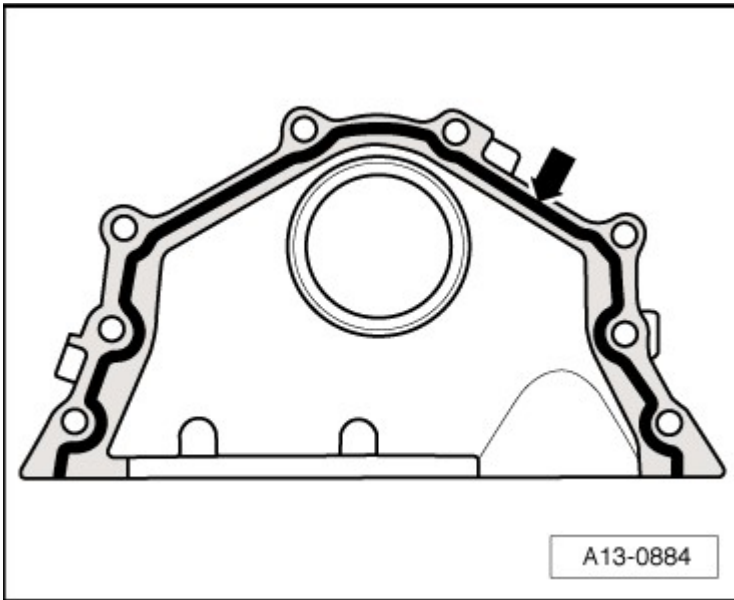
Applying Thin Bead Of Sealant To Clean Sealing Surface Of Sealing Flange
